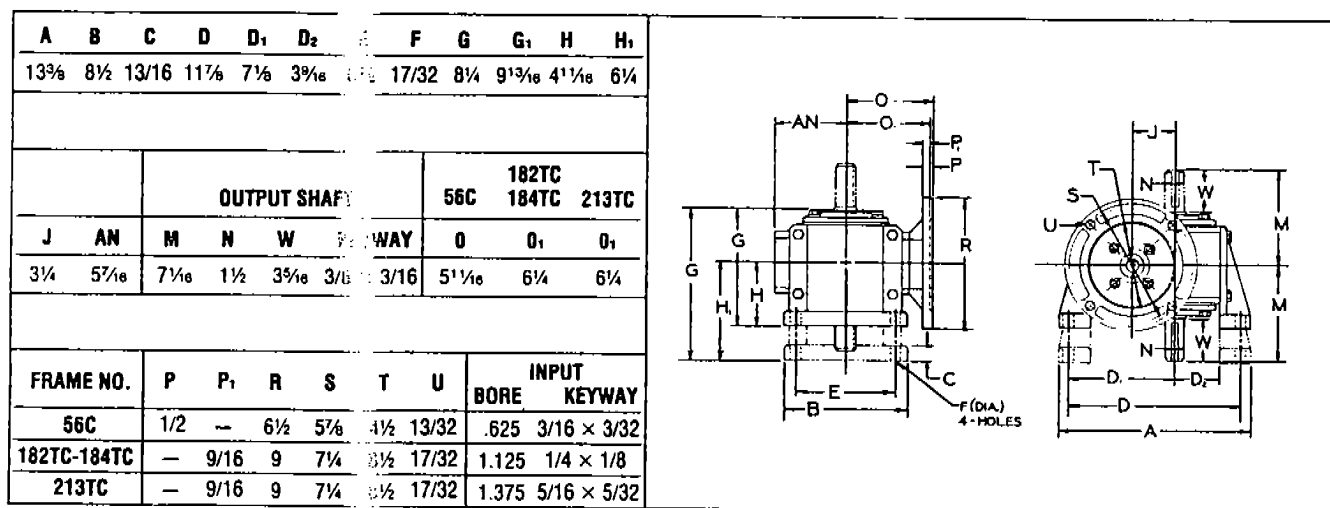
Dimensions of Reducer with Optional 6X504 Vertical Mounting Base
